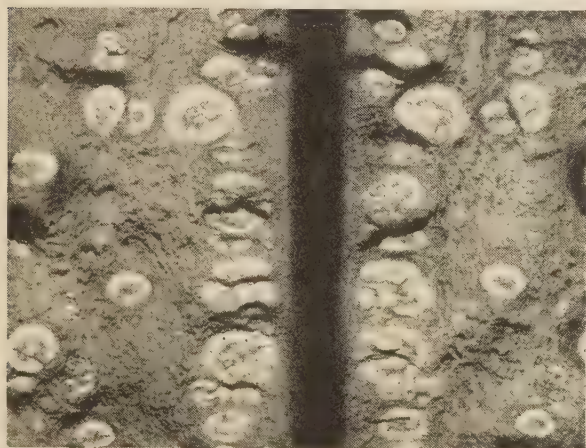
LOCALIZED TRANSCRYSTALLINE HYDROGEN EMBRITTLEMENT CALLED "FISH EYES," OBSERVED ON FRACTURE OF A TENSILE SPECIMEN OF WELD METAL; $\times 3$
